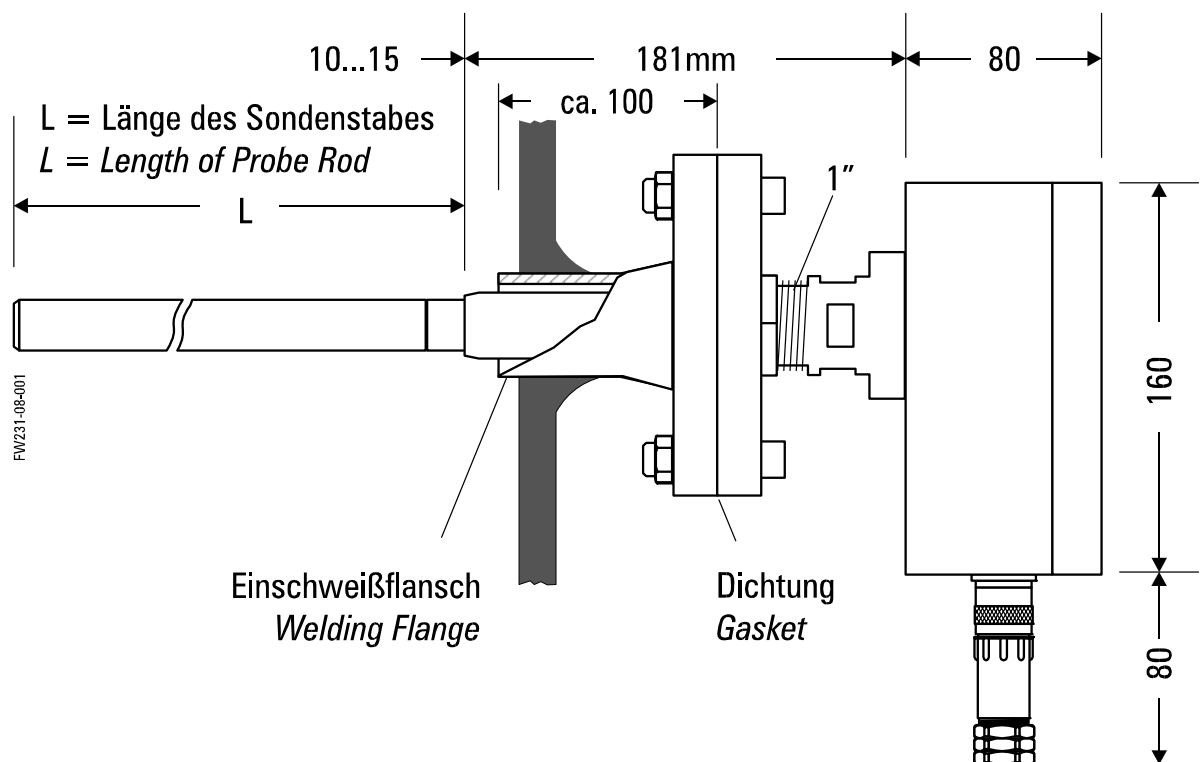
Dimensional drawing of sensor probe with flange according to DIN 2633 DN 32
